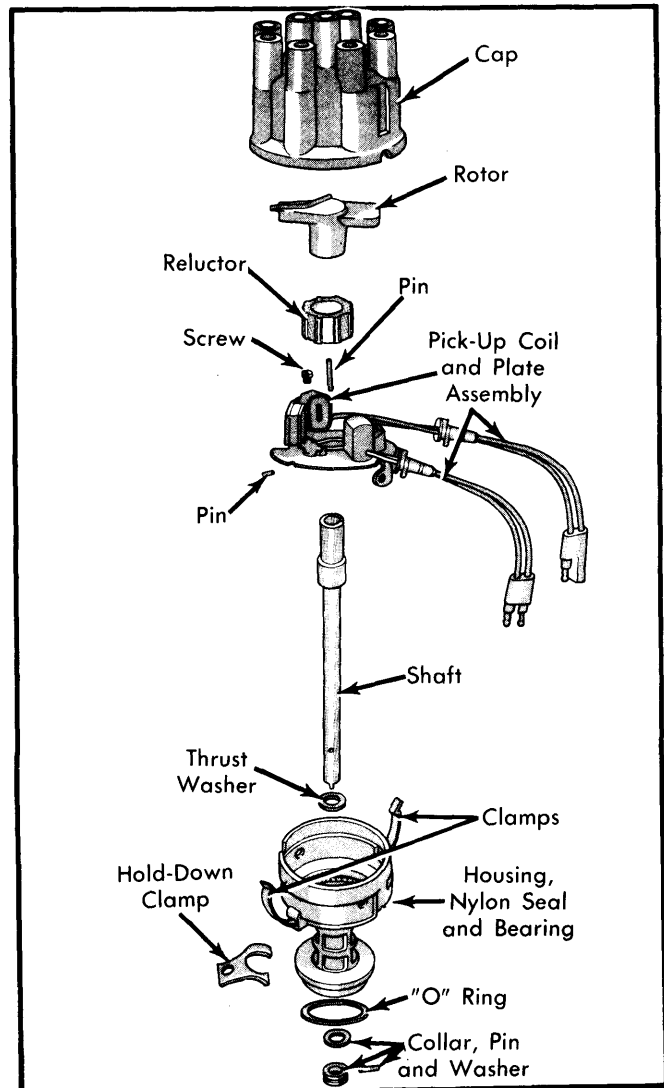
Exploded View of V8 Distributor for Chrysler Corp. Vehicles
